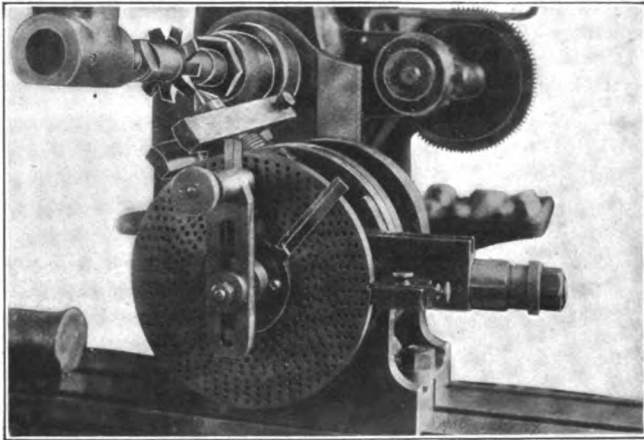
Spiral Head Set for Proper Cutting Angle and Indexing.
